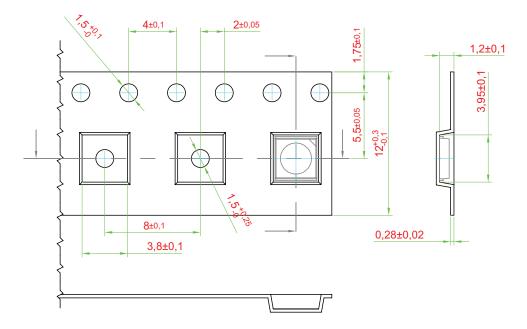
Pocket tape dimensions for LUXEON 3535L Line.
